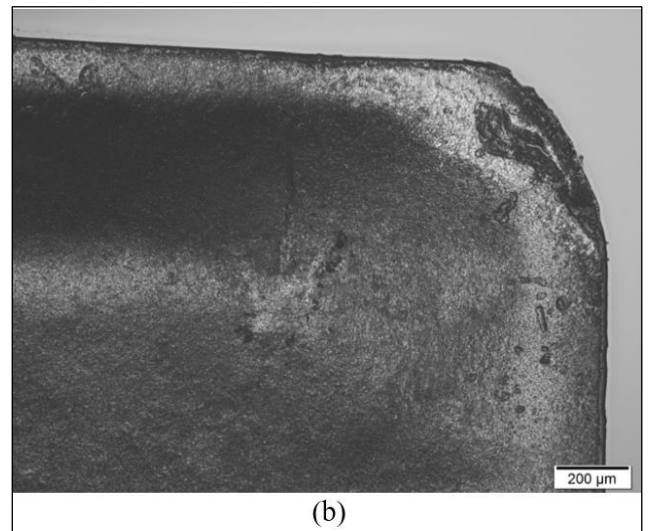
Wear on the cutting tool rake face with insert 0,4 mm: (b) With sealant.
